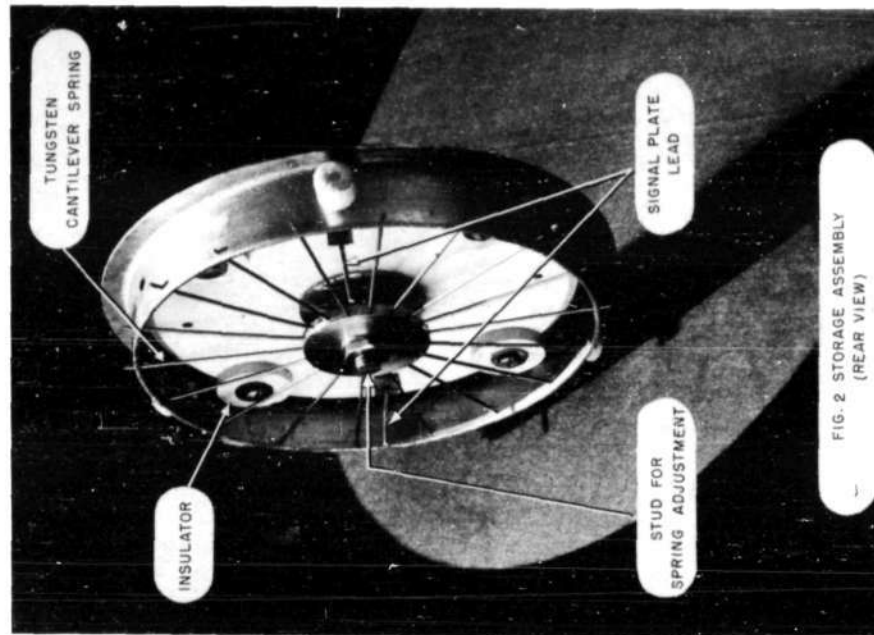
STORAGE ASSEMBLY (REAR VIEW)
